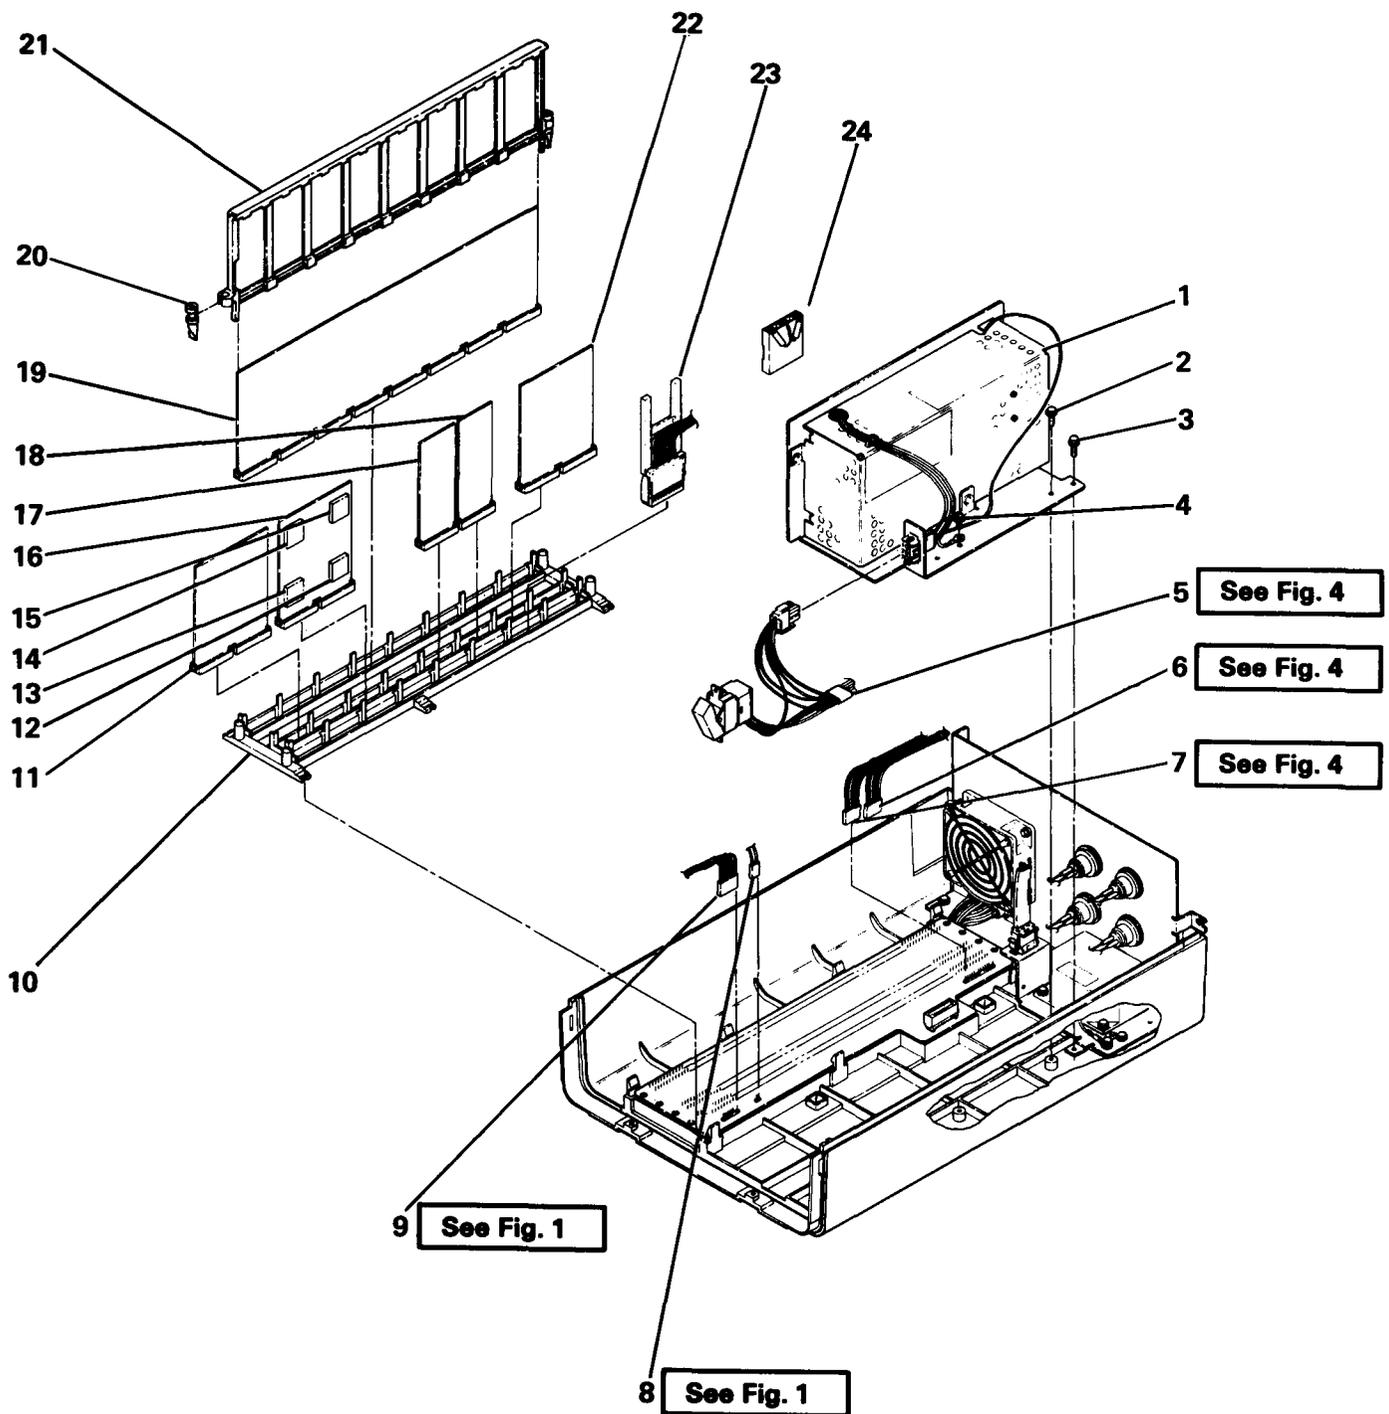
BASE ASSEMBLY. SEE LIST 2.
